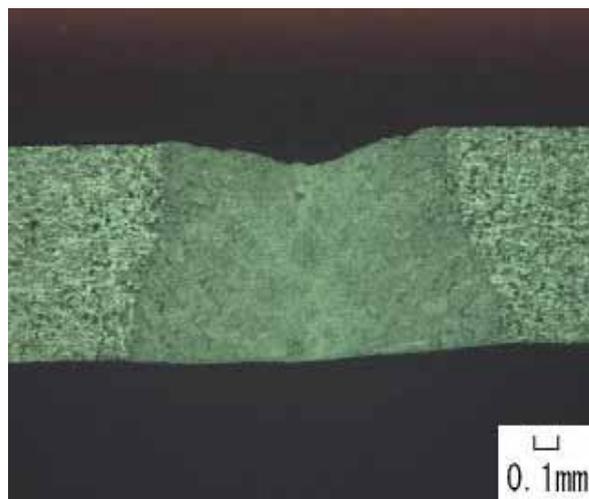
Macro structure of YAG laser butt weld zone.
